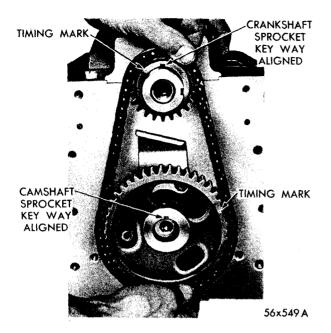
Installing Timing Sprockets and Chain (Engine Shown in Repair Stand)
